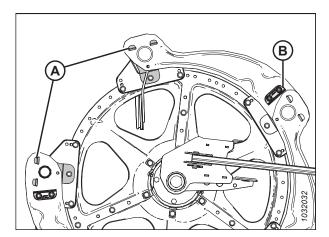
Reel Endshield Removed – Outboard Tail End
